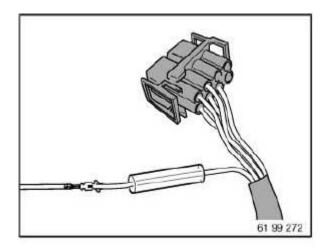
Identifying Crimp Unused Wire End To Butt Connector Courtesy of BMW OF NORTH AMERICA, INC.
